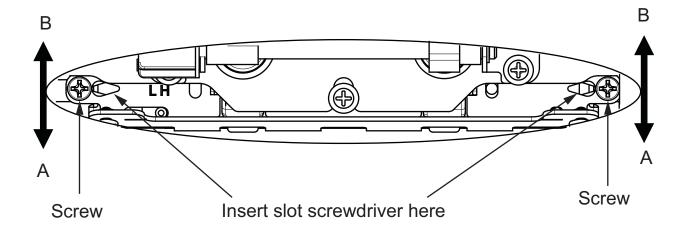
, Print Head Adjustment, Enlargement of Portion of Figure 6-9
